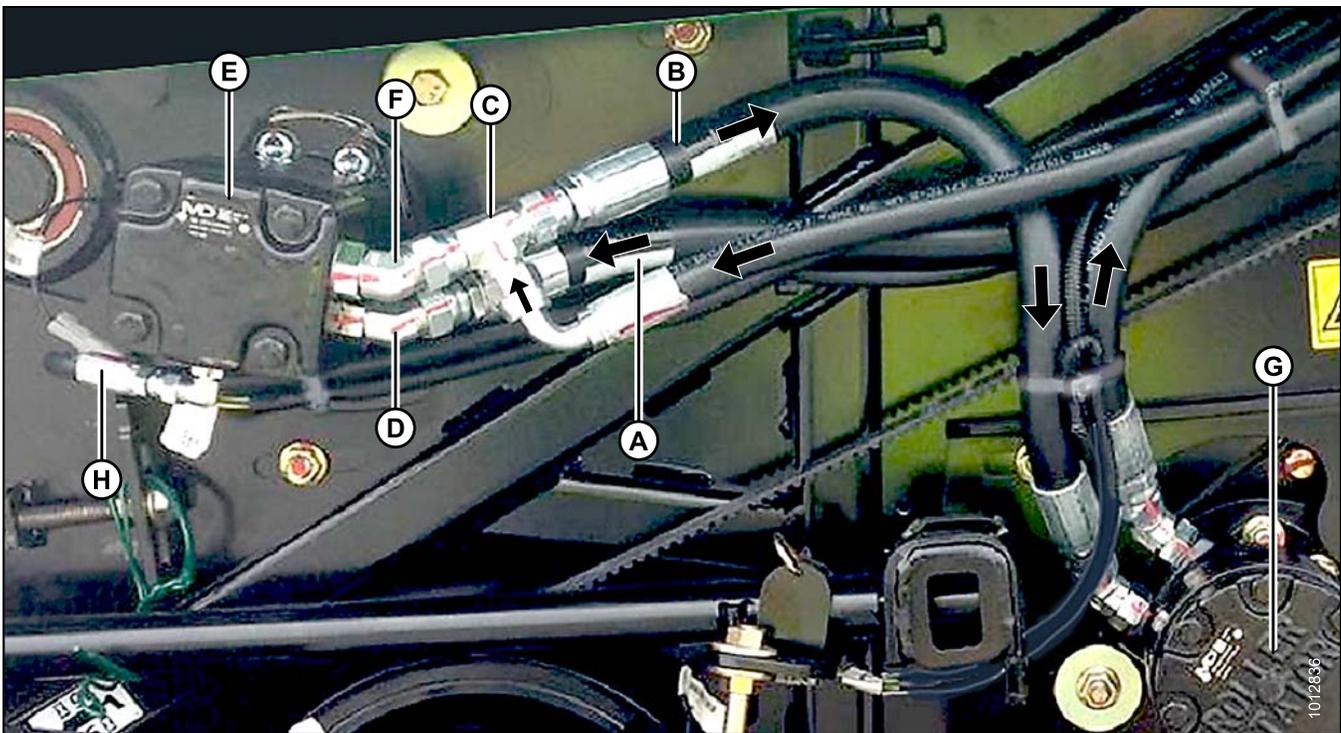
New Reel Motor, Auger Motor, Hoses, and Fittings (M150, M155, M200 Configuration)
